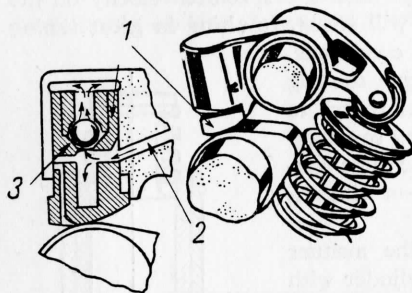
Hydraulic tappet in the rocker of an aircraft engine.
